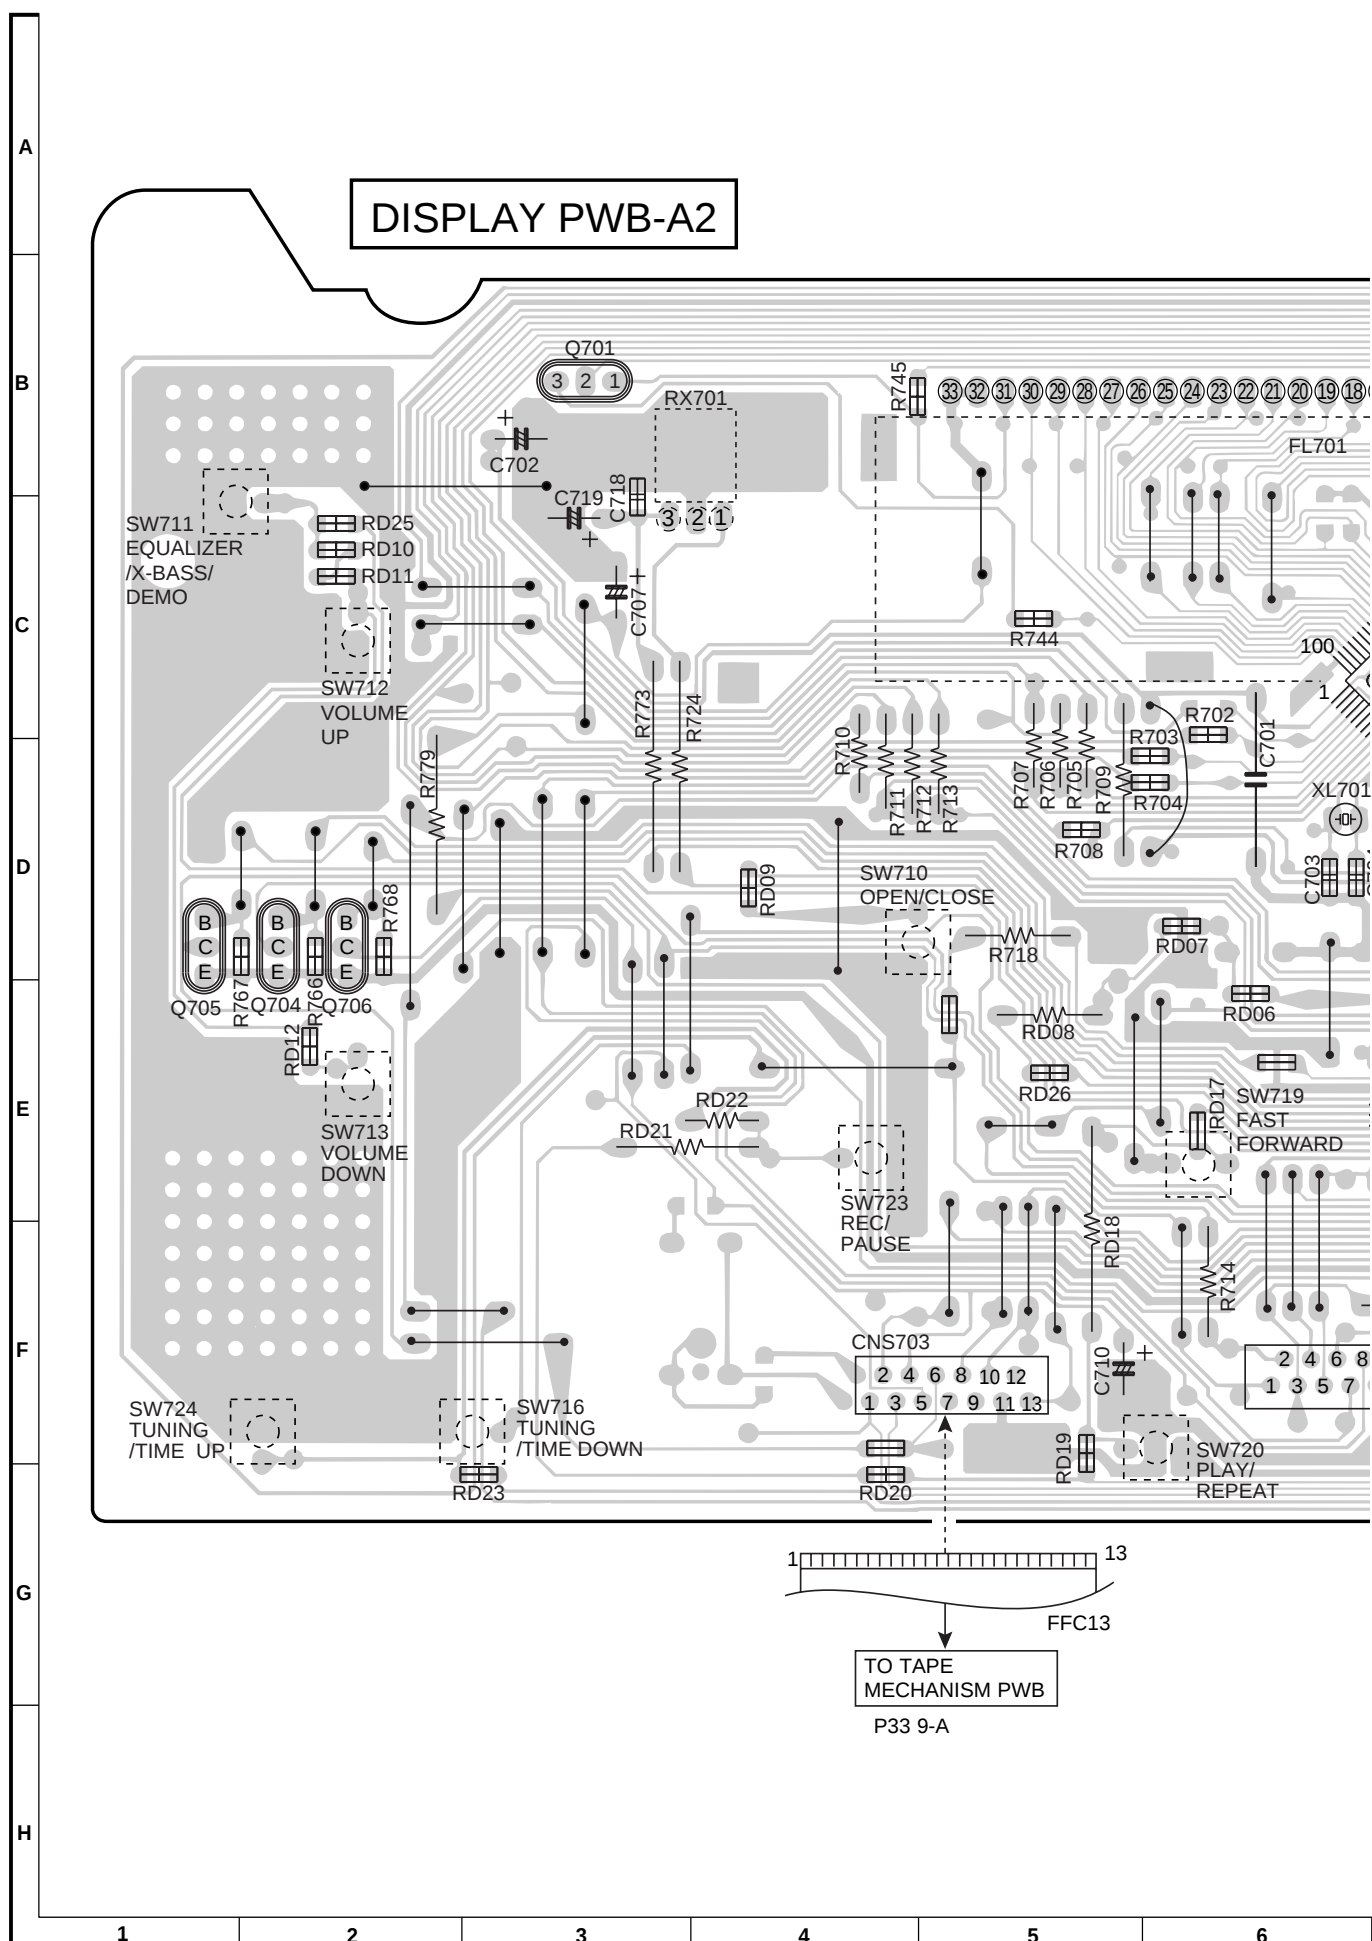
WIRING SIDE OF P.W.BOARD (3/6)
